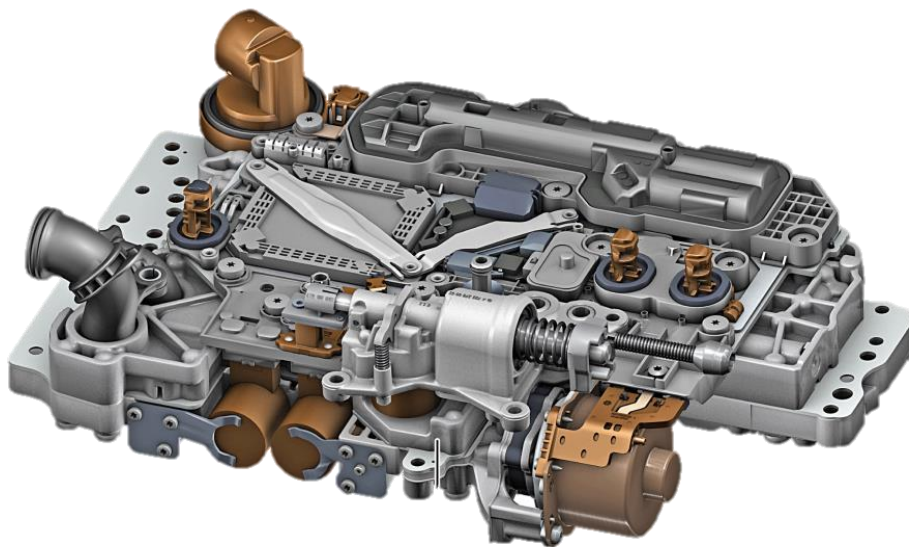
Electrohydraulic control unit concept with hydraulic valve body assembly, auxiliary electric pump and shift by wire system
